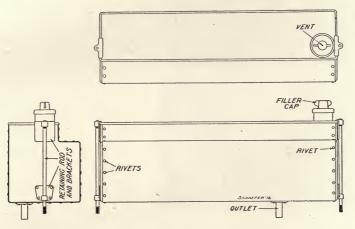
Autocar Tank with Riveted and Soldered Ends.
